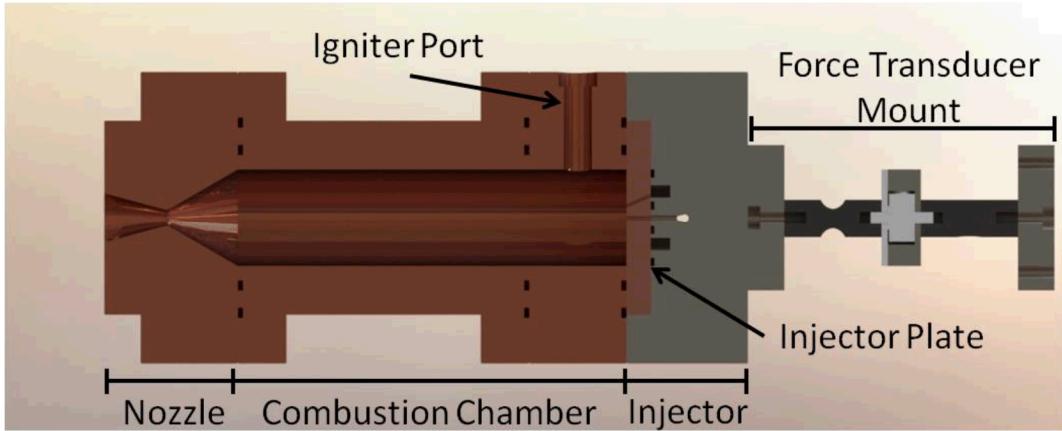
CAD cutaway of assembled rocket engine. Main components are labeled.
